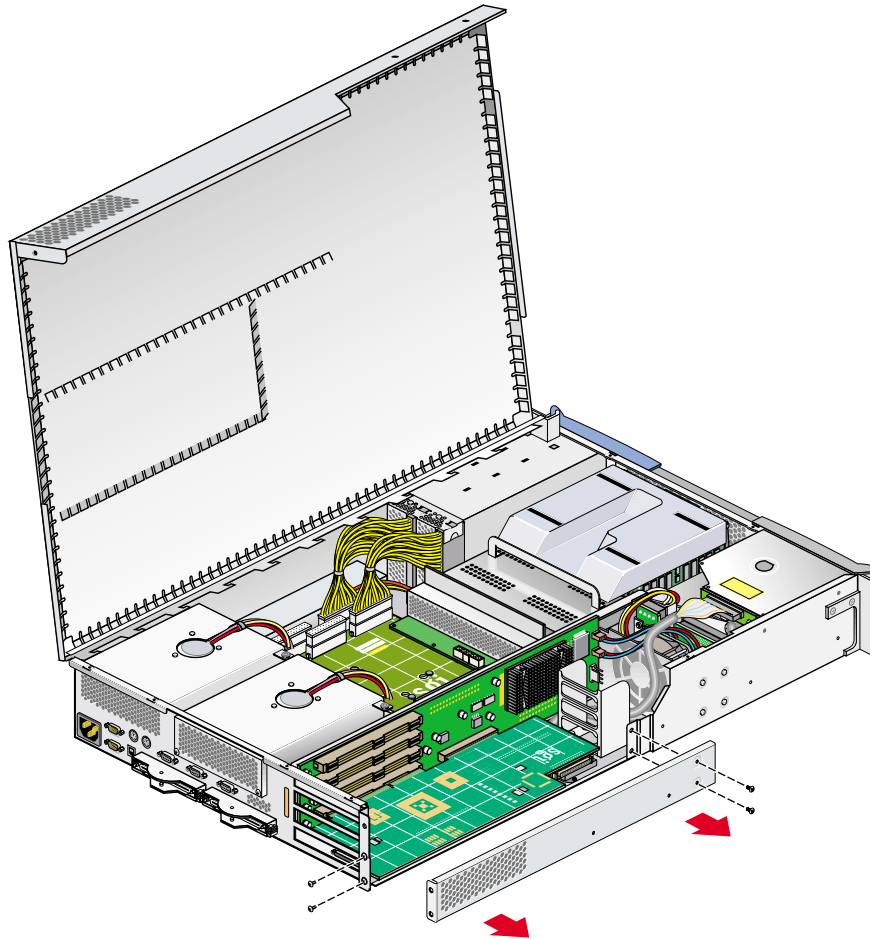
Removing the Lower PCI/PCI-X Support Bracket
